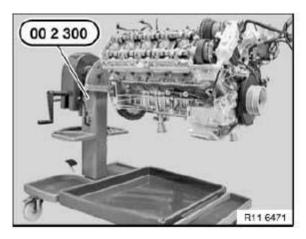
Identifying Special Tool 00 2 300 Courtesy of BMW OF NORTH AMERICA, INC.
